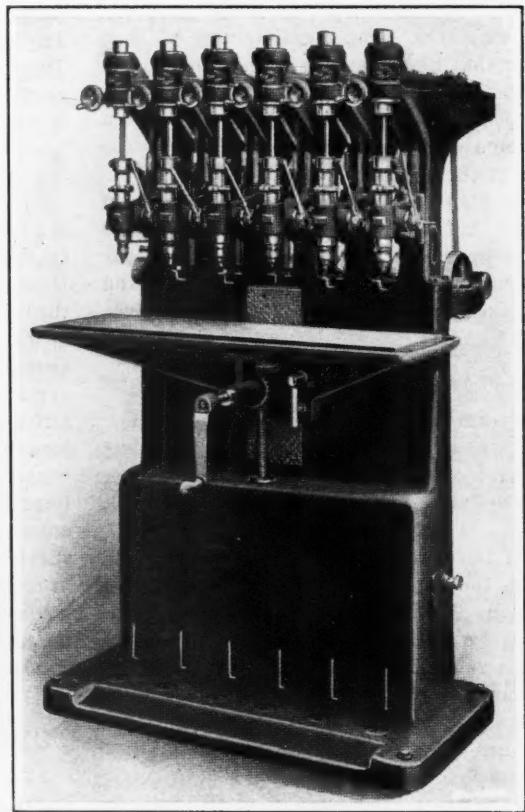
Modern Type of High-speed Ball-bearing Sensitive Drilling Machine having Spindle Construction illustrated at B, Fig. 6
